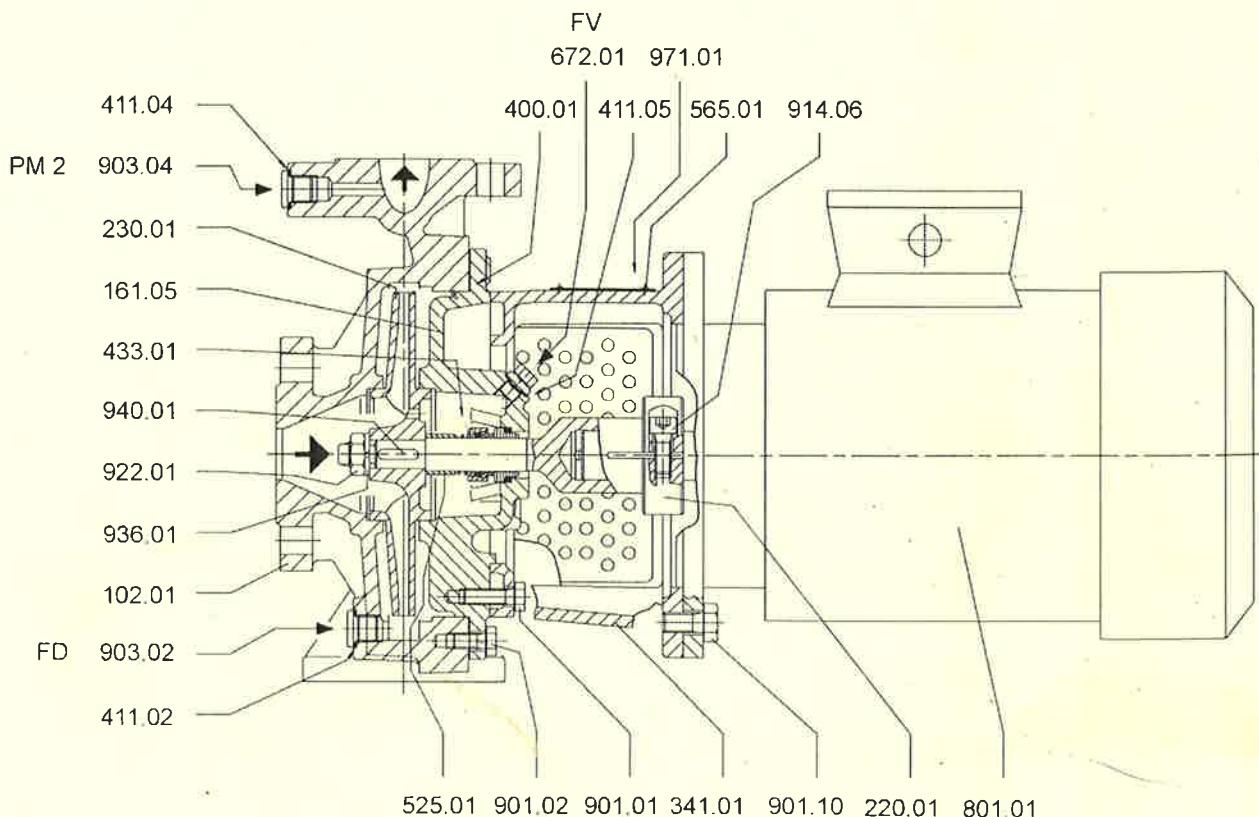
U3...D – Unbalanced mechanical seal – sizes with diameter 16 at the shaft seal
